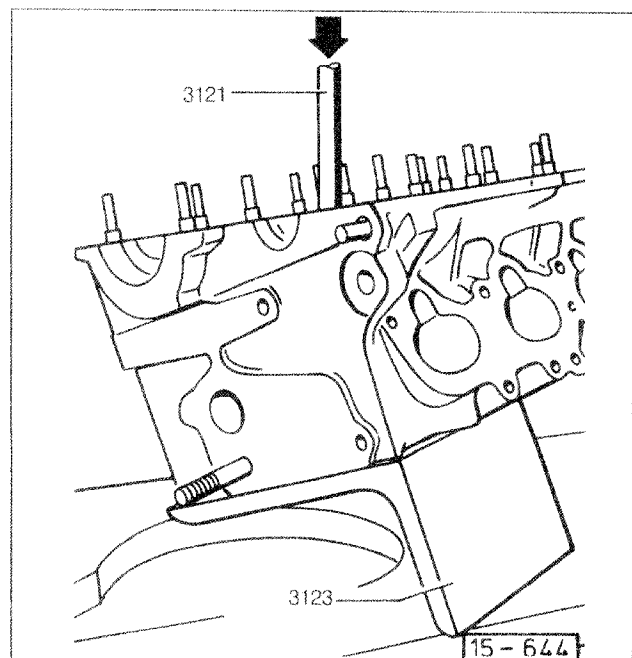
Angle plate (Volkswagen special tool no. 3123) used to support 16-valve cylinder head when removing and installing intake valve guides.
